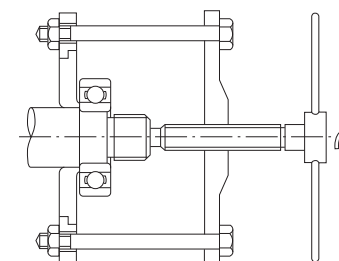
Removal of Inner Ring Using Withdrawal Tool (1)
